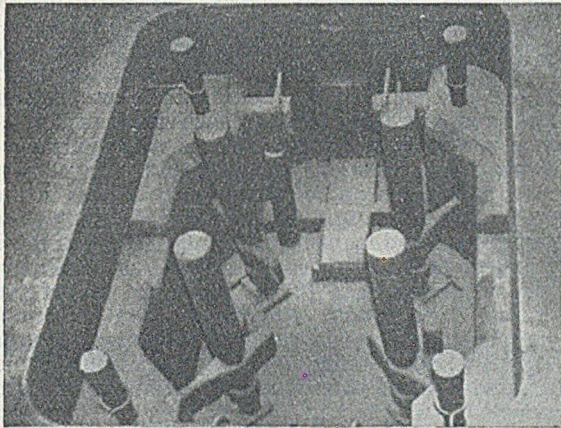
Anvil-block Mould with its Cores assembled in Position.
